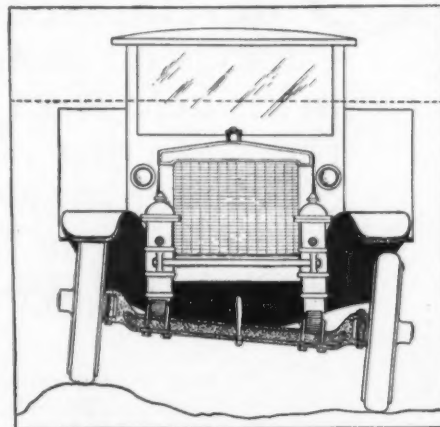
, illustrating how air springs absorb the uneven road conditions and prevent wrenching and twisting of frame.
